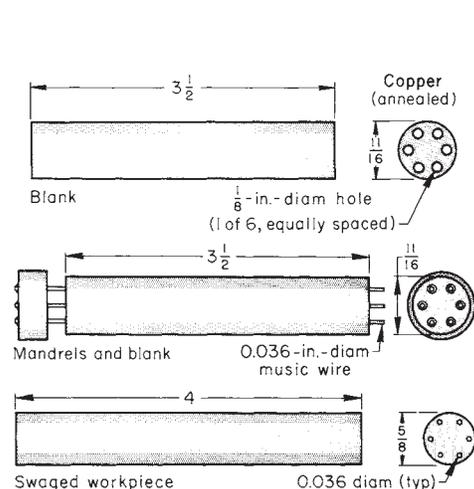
Blank with drilled holes (top) that was swaged over music wire mandrels (center) to increase length and to reduce outside diameter and hole diameter (bottom). Dimensions given in inches
